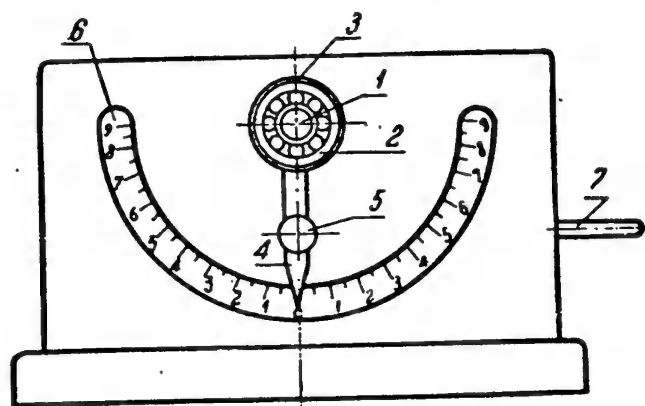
Setup for Checking the Moment of Friction in Bearings
